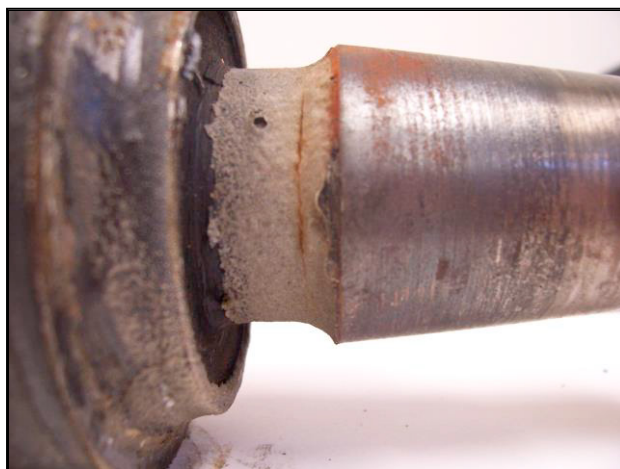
Fatigue fracture of a radius rod pin.
